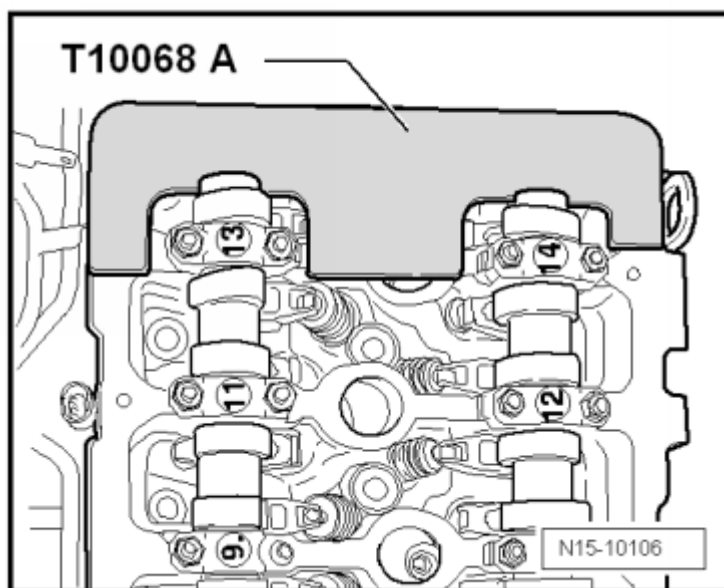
Identifying Camshaft Bar T10068 A Engage In Shaft Grooves
